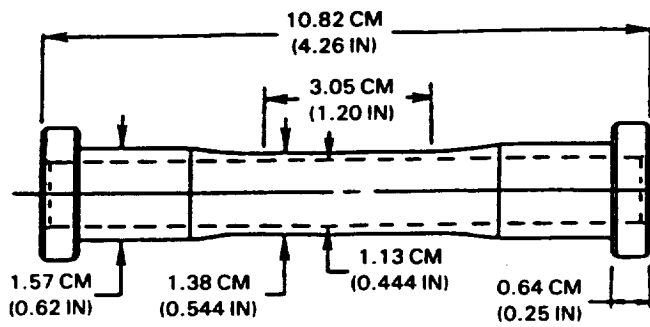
Geometries of Uniaxial Tubular Specimens for Fatigue Testing
